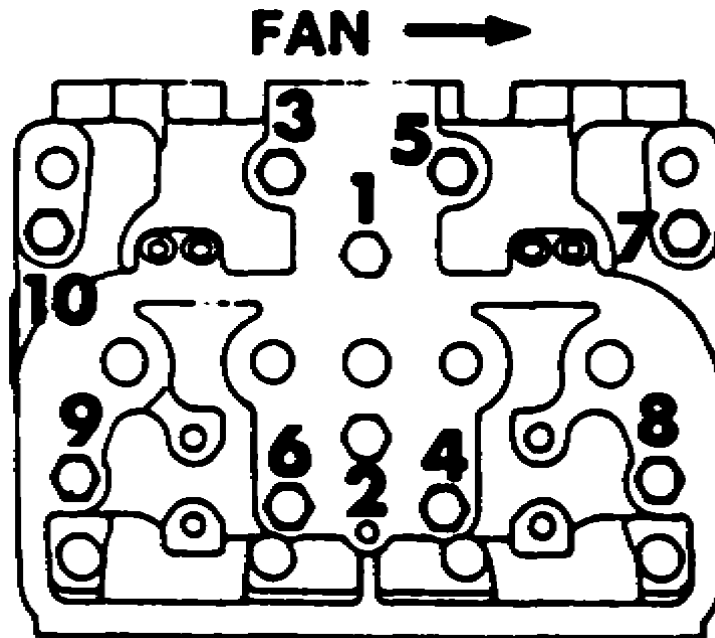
MW24 B CYLINDER HEAD BOLT TORQUE SEQUENCE
